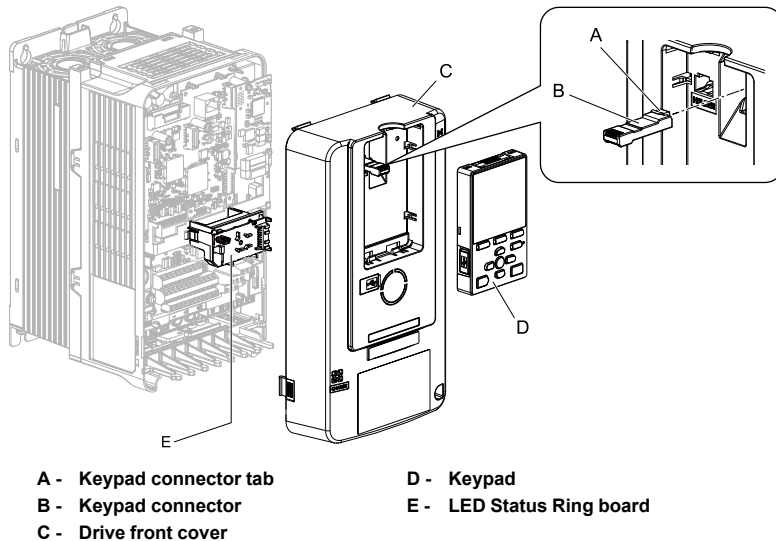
Install the LED Status Ring board, Front Cover, and Keypad
